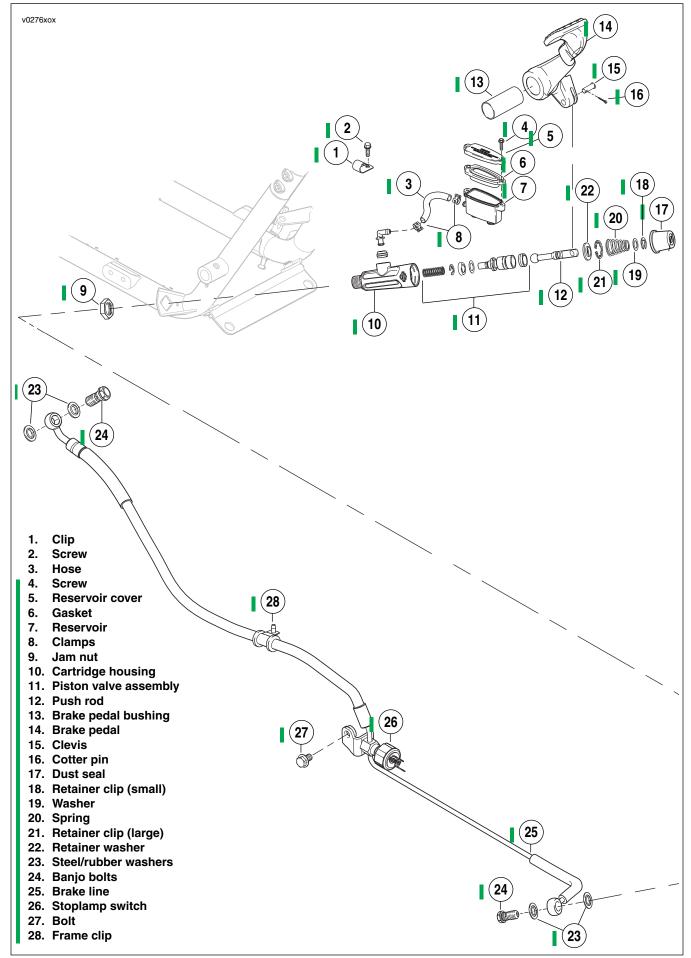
Rear Brake Master Cylinder/Reservoir
